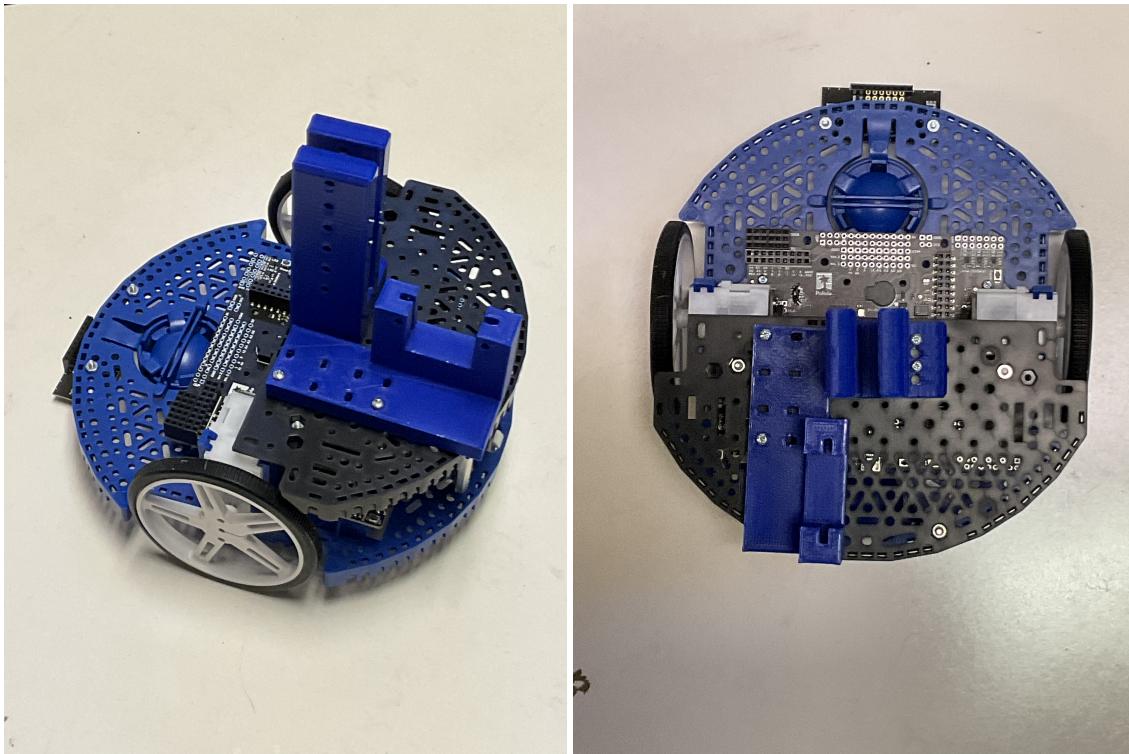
Servo and arm mounts mounted. Once you install the mounts, you can attach the expansion plate to the base, as shown in this figure.
